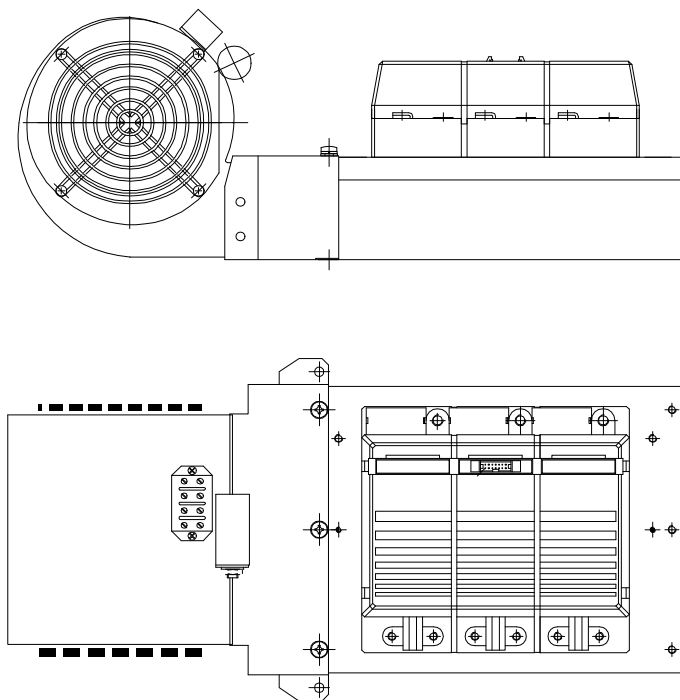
SKiiPPACK 3 standard assembly with SKF 16B fan
